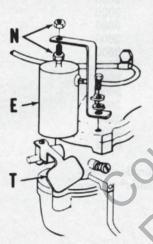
Loadamatic® Automatic Idle Control\* is adjusted by turning nuts (N) until bottom of electromagnet (E) is parallel with throttle arm (T). Do not bend throttle arm or electromagnet bracket.
